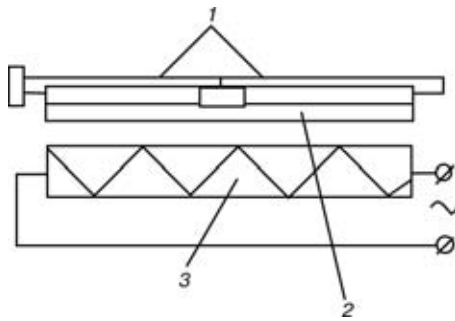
Schematic of the device used for soldering samples: 1 — butt samples made from copper; 2 — aluminium plate; 3 — heater
